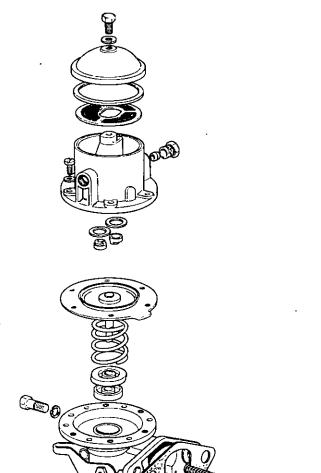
Exploded view of Fuel Lift Pump. Note: Later lift pumps have four bolt fixings.
